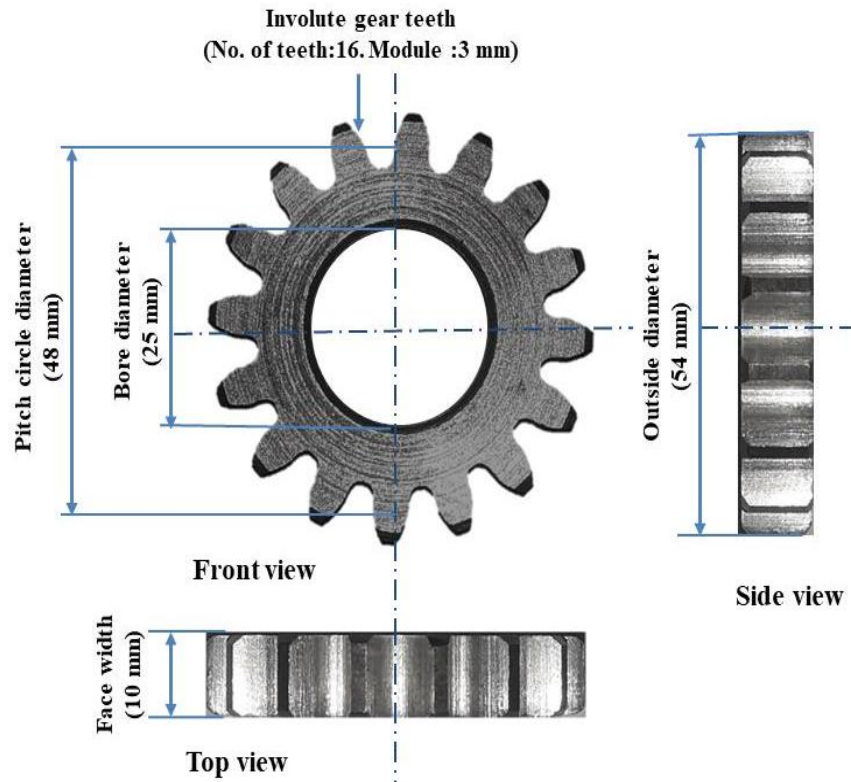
Photographs and specifications of the hobbed spur gear used as workpiece.
